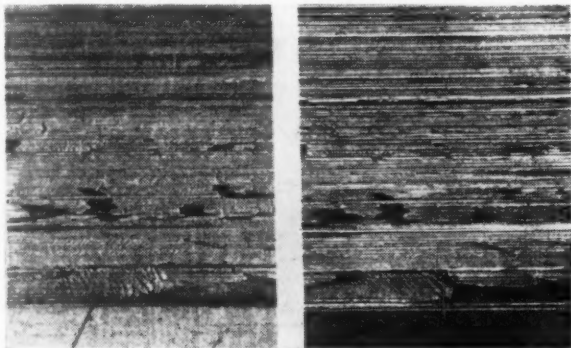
is a section of a copper-lead bearing shell which formed the rod half of the bearing. Lead smeared over the surface of this bearing is indicated in the left figure by the light portions. The somewhat darker portions of the left figure represent smooth bearing surface. With lighting direction changed by 90 deg, the smooth bearing surface is lighter in color in the figure at the right.
